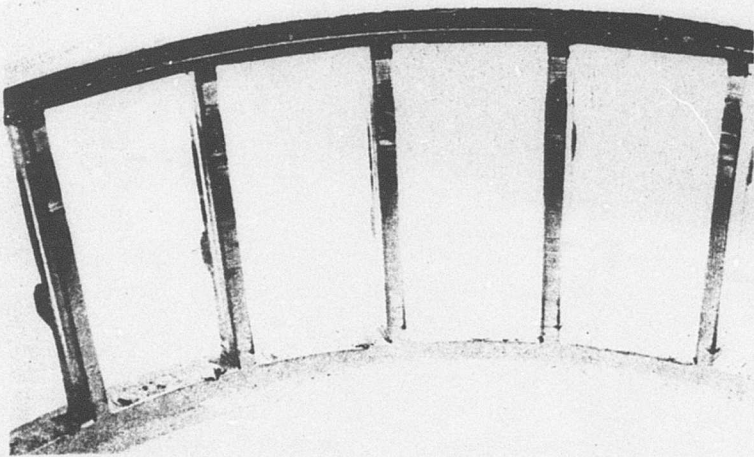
View of Cage Pockets - Bearing S/N 73-50.
